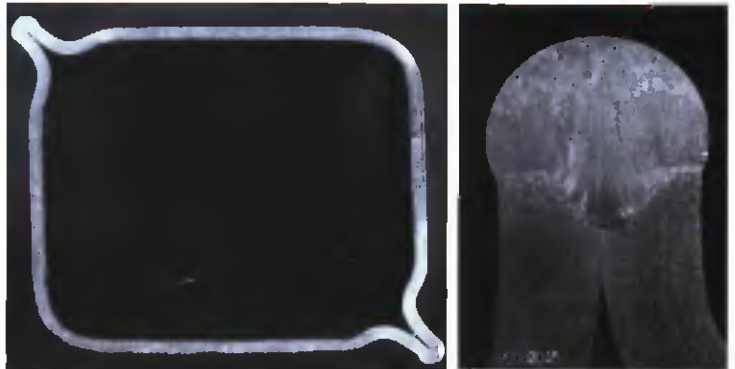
Macro section of the NVEB weld (12 m/min, 19.3 kW) at the flange of 2 × 2.5 mm Al-3%Mg deep-drawn shells.
